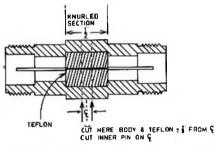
UG29B/U Type N Connector showing the position of cuts to make two end adaptors.
